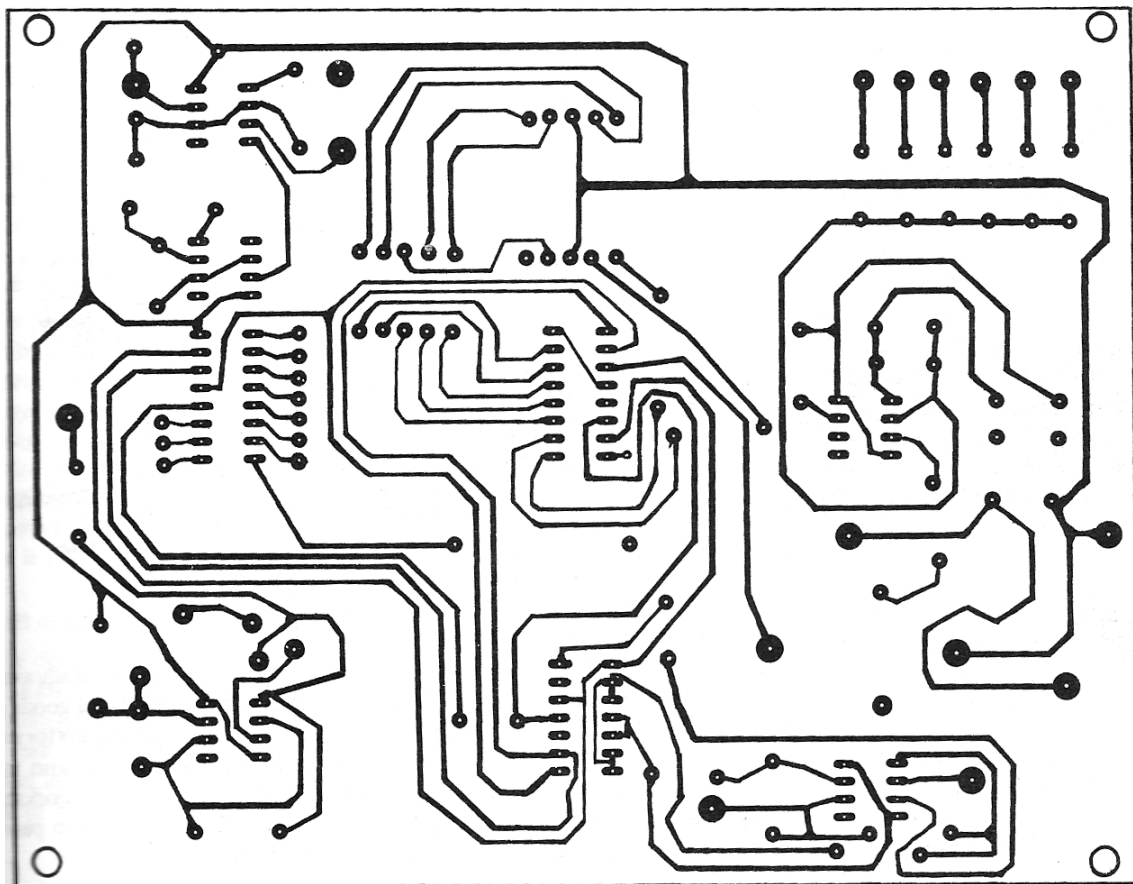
Actual-size PCB layout for a volunteer in the kitchen.
